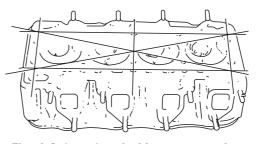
Locations for Measurement of Distortion of Cylinder Head
